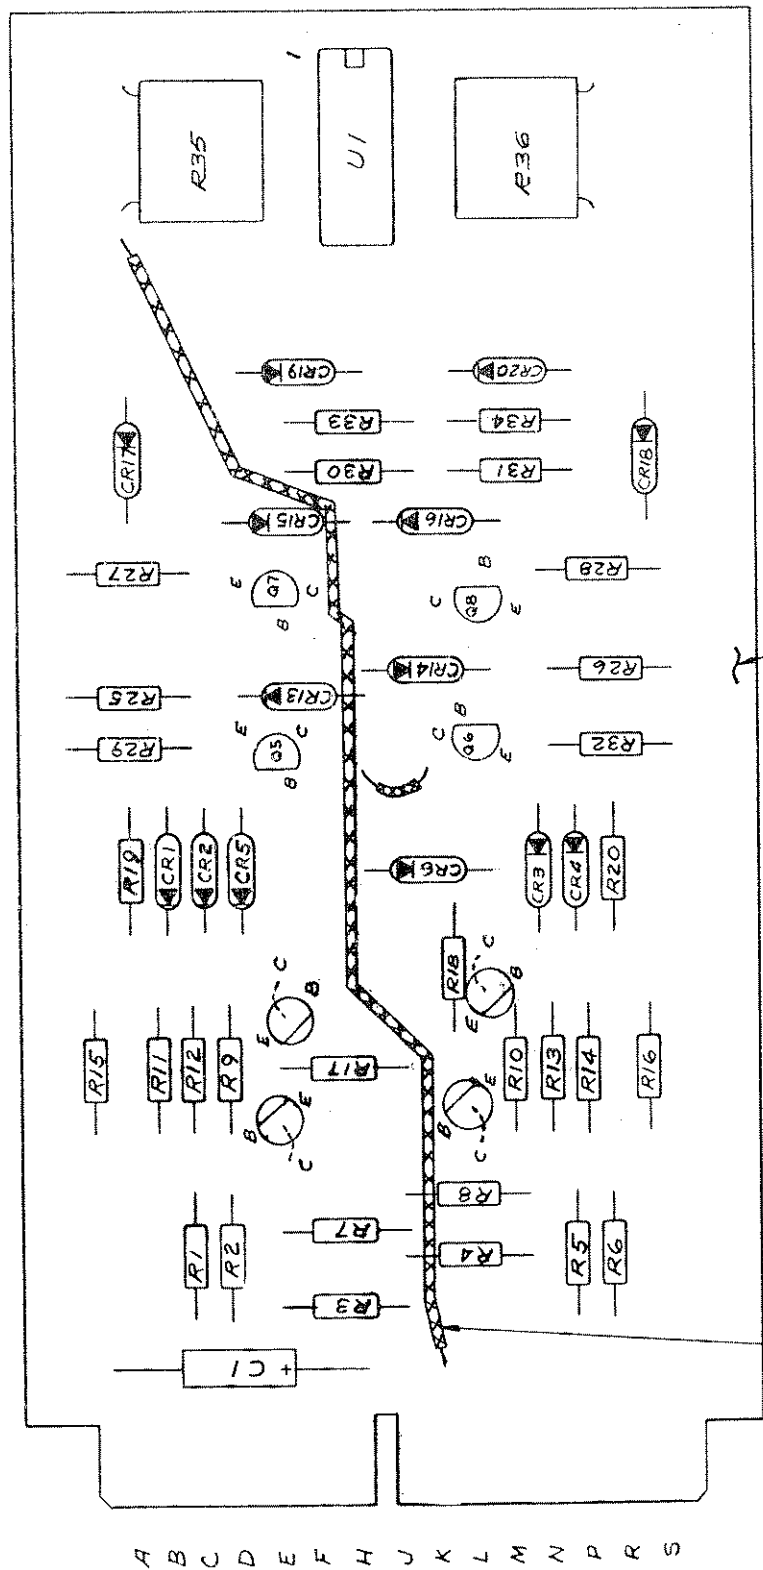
Main Frame Card A7 Flip-Flops and Switches, Parts Location (Drawing No. 102520A)
